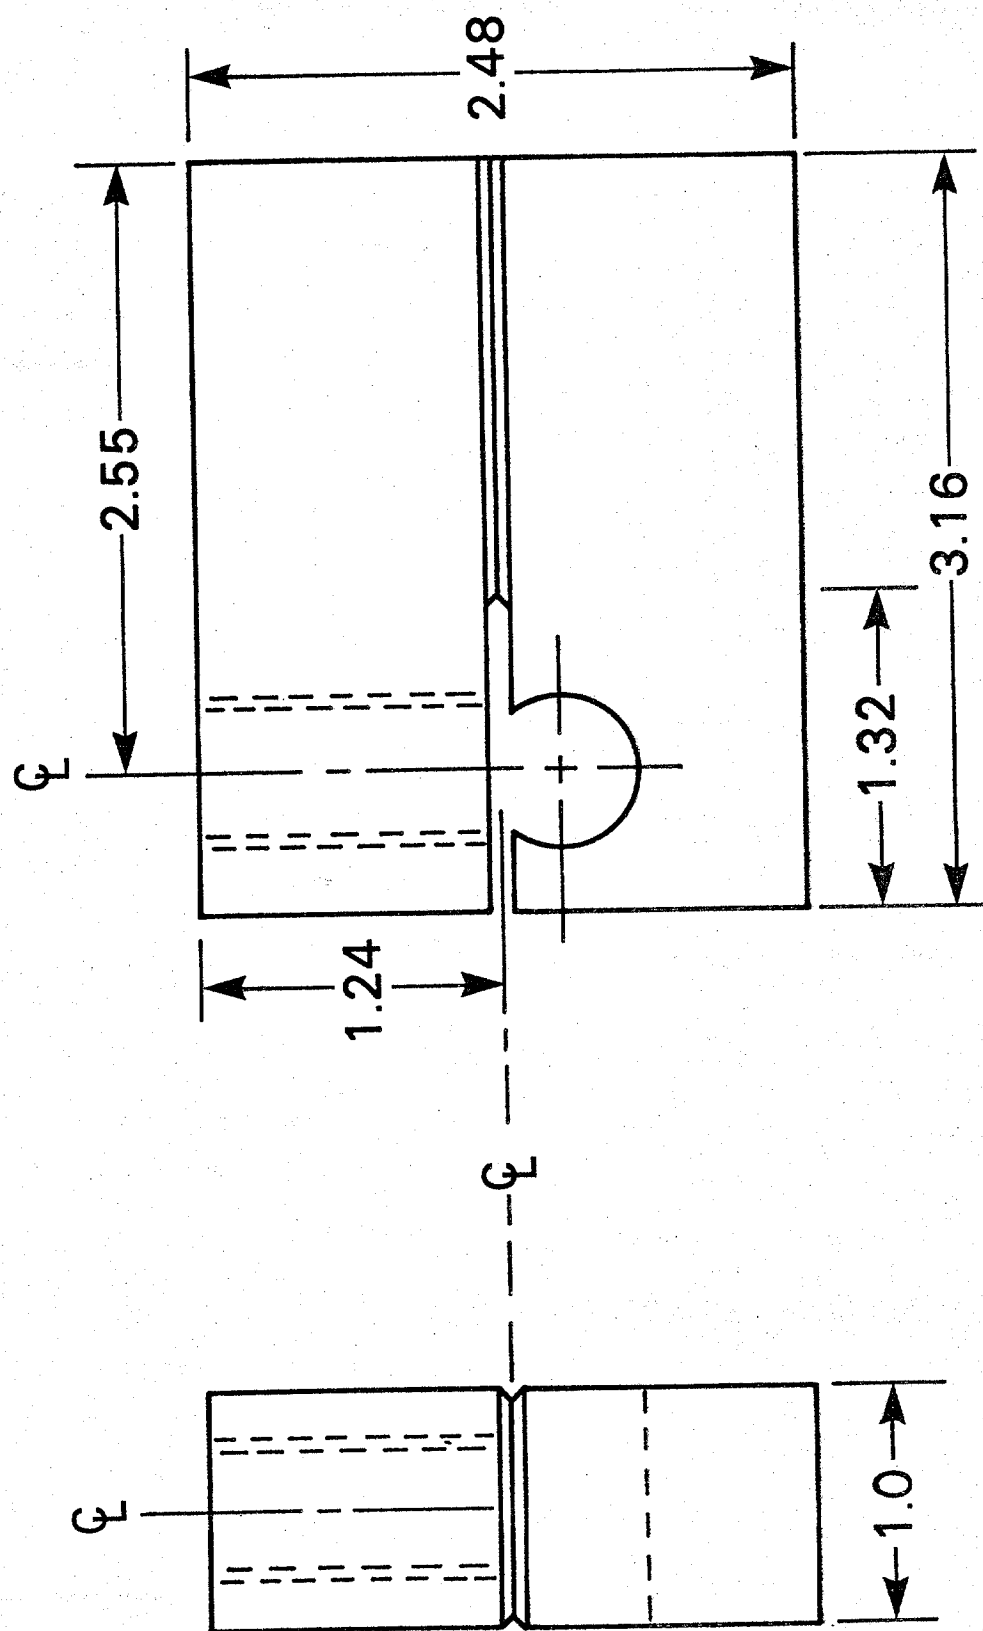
Configuration of the 1T WOL fracture mechanics test specimen.
